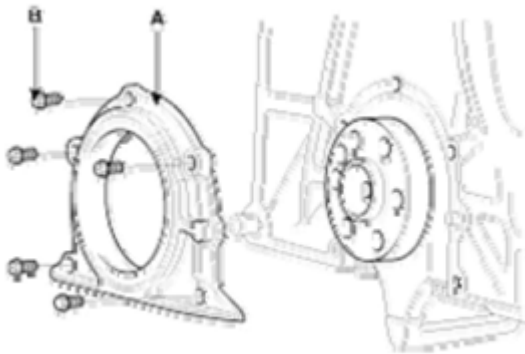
Identifying Rear Oil Seal Case & Bolts
